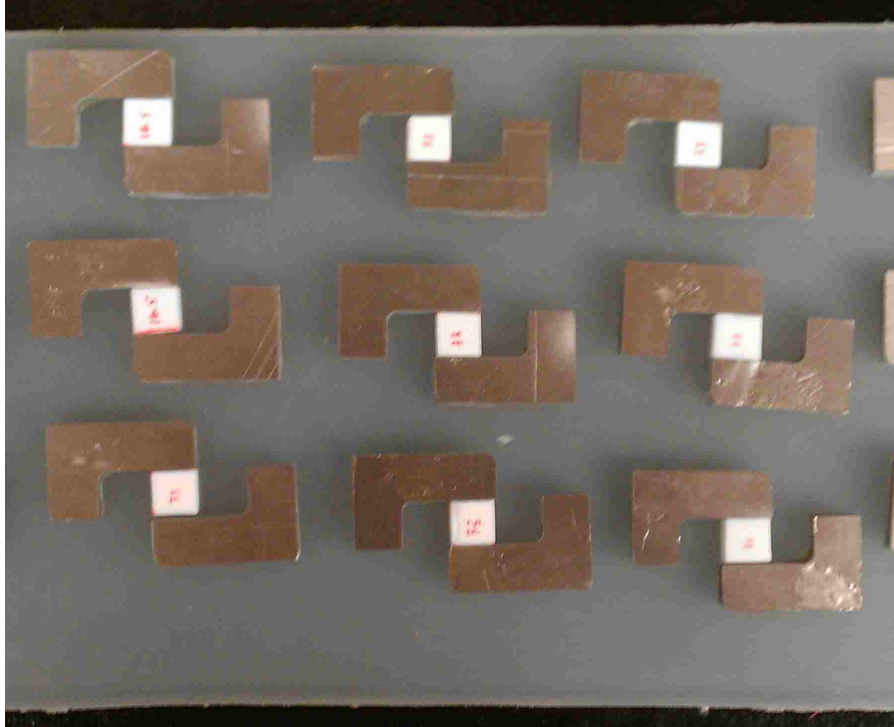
Assembled Shear Samples. Aluminum L brackets were machined using the University waterjet and adhesively bonded to the PUA samples in the center.
